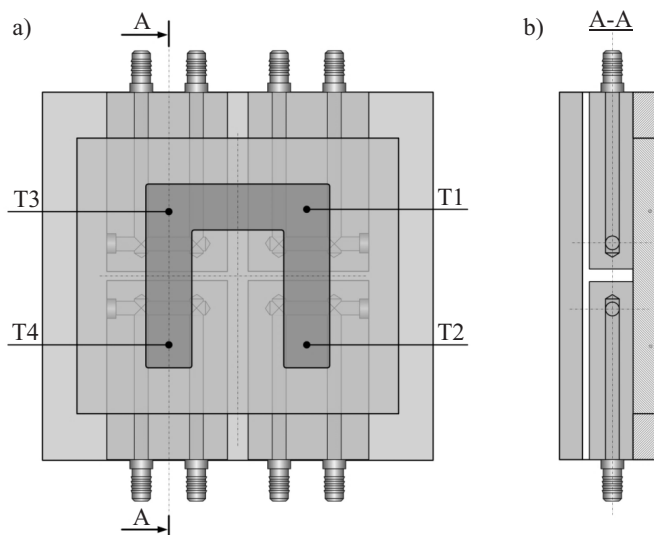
Cavity part of the experimental injection mold: a) mold plate with molding, b) top view of the mold with cooling inserts
